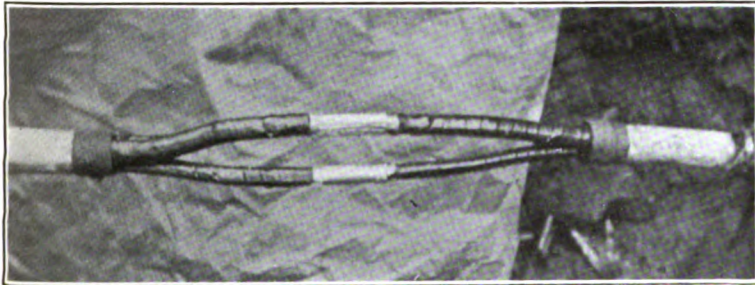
A—JOINTS WITH CONNECTORS SOLDERED [NIMS]
